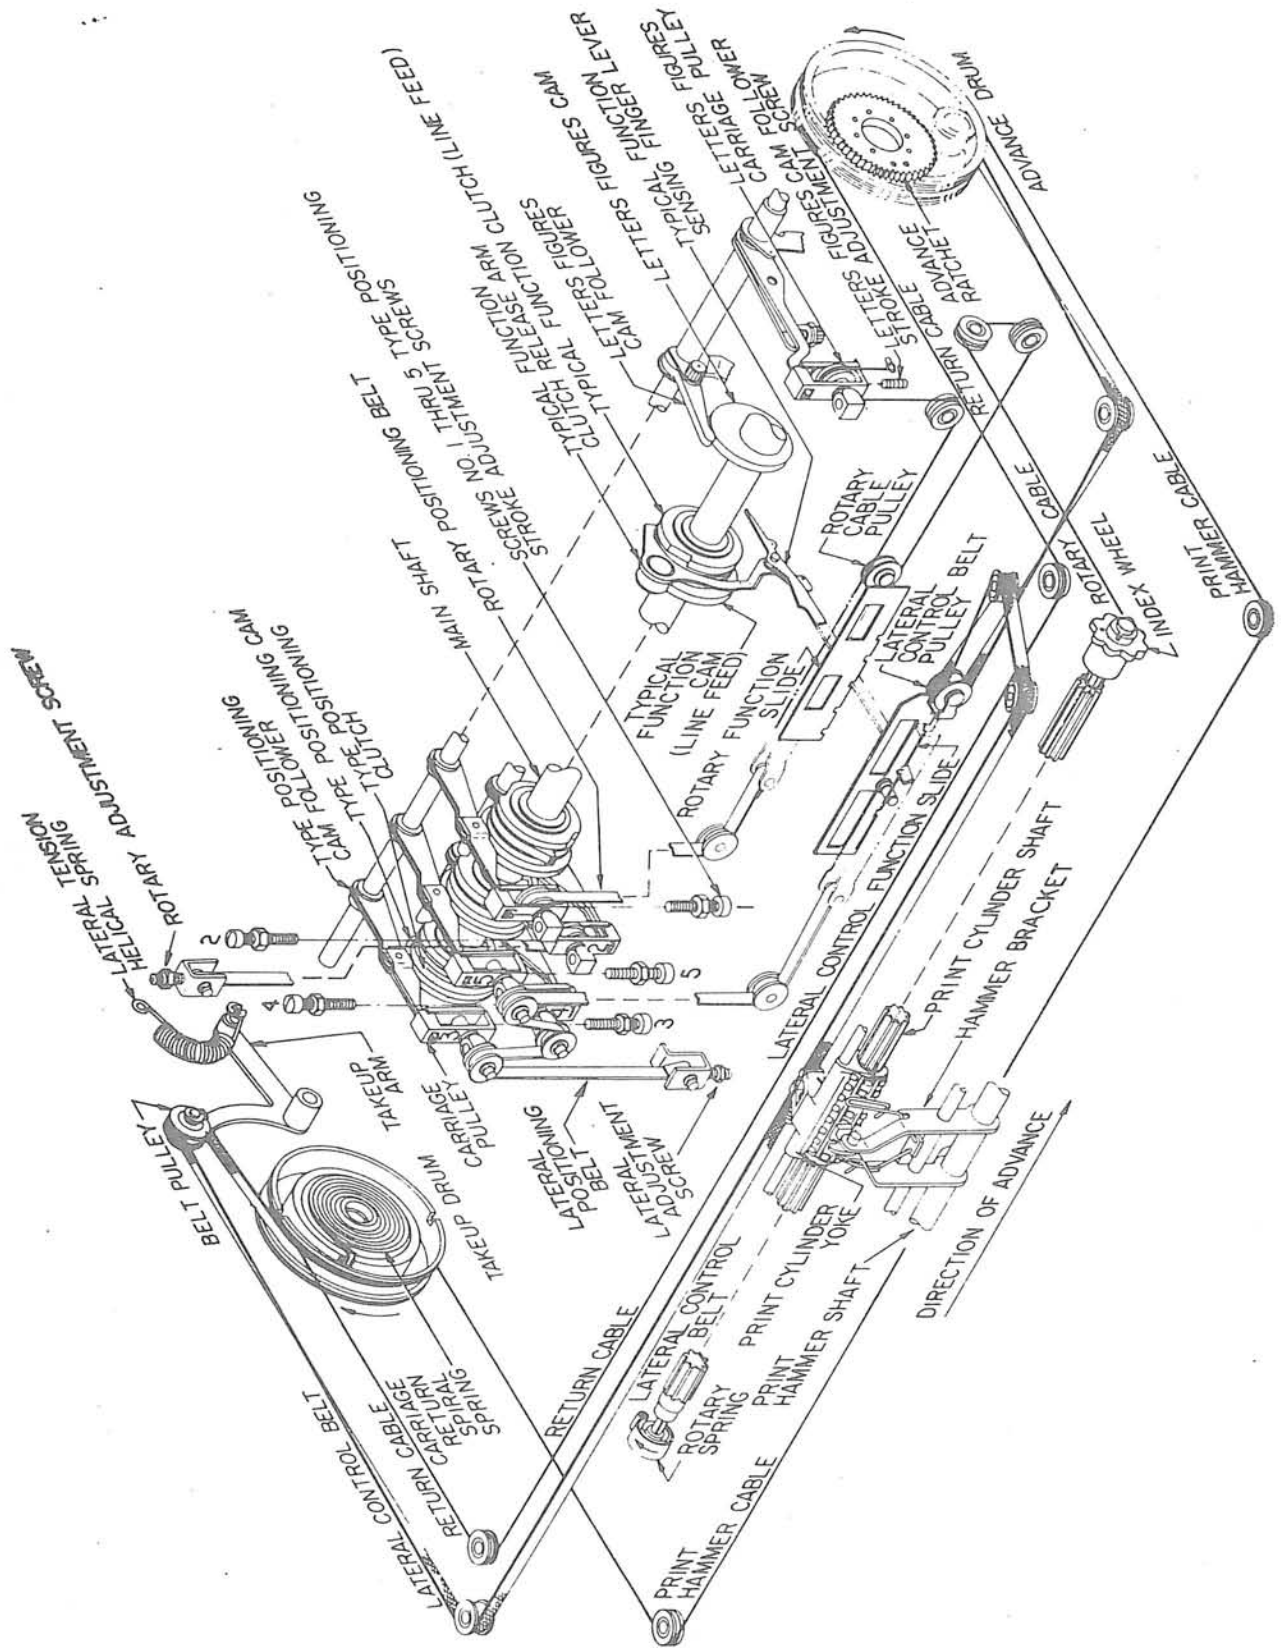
Type Cylinder and Print Hammer Positioning System
